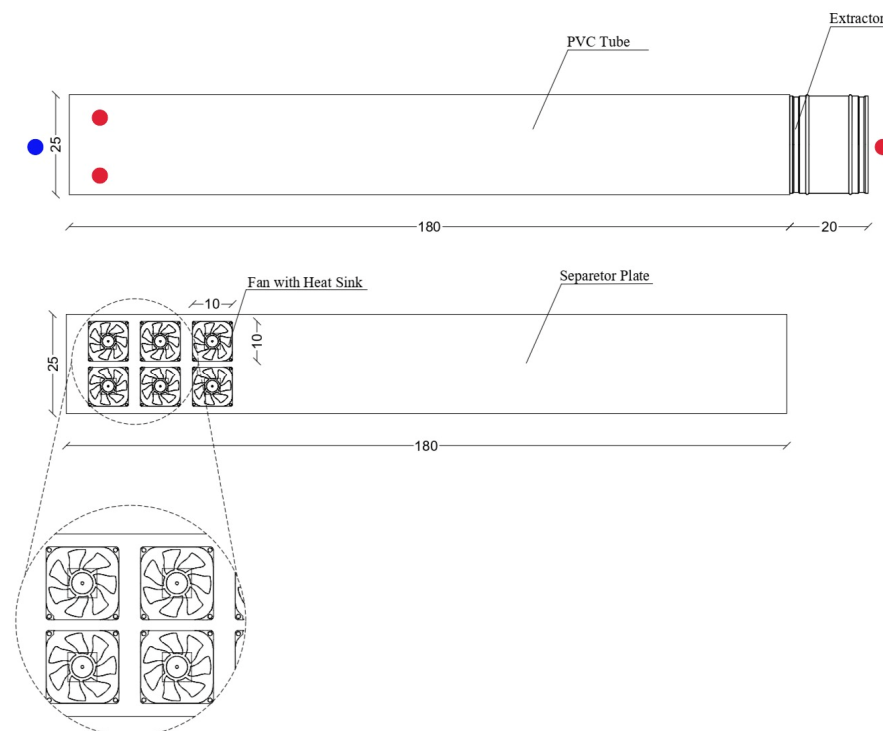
Second configuration—technical drawing. Thermo-hygrometric probes in red, hot-wire thermo-anemometer in blue.
